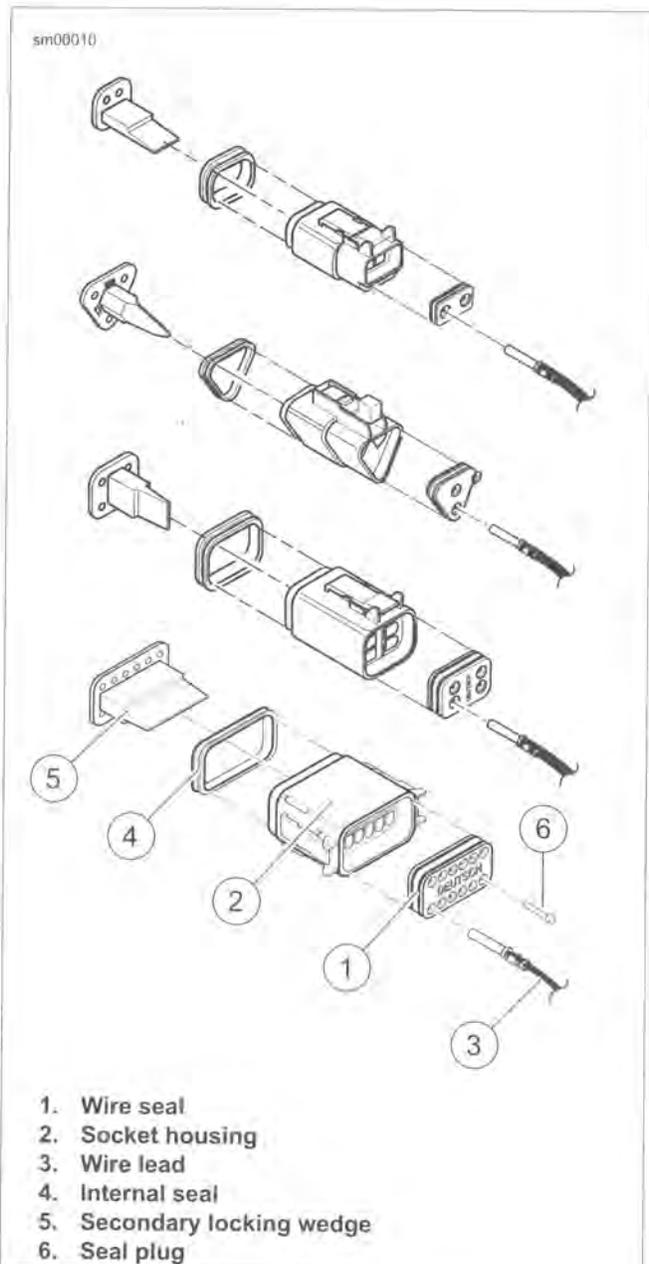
Deutsch DT Sealed Connector: 2, 3, 4 and 12-Place Socket Housings
